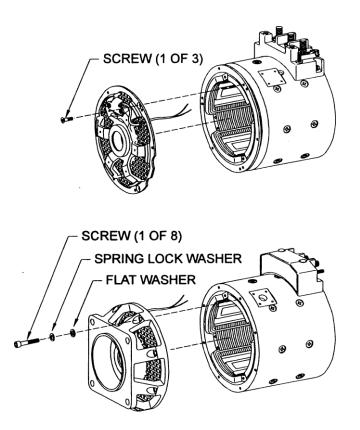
Attaching Drive-End Bearing Support Assembly to Stator and Housing Assembly
